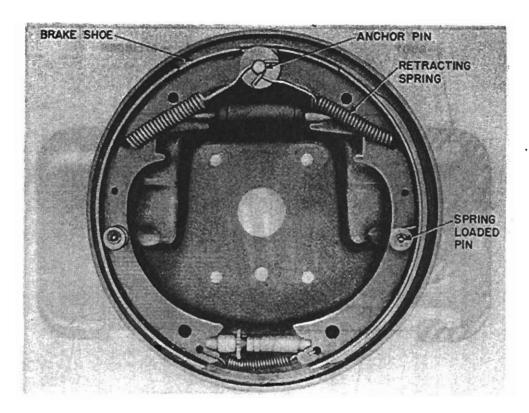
Showing Flexible Method of Mounting Brake Shoes to the Support Plate.
